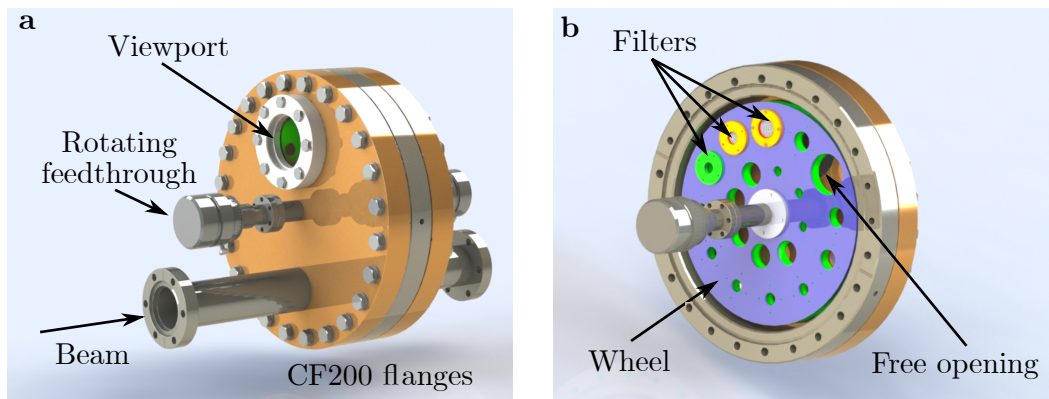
Filterwheel CAD drawing. a) The beam propagates from left to right through the selected filters. A CF50 viewport eases the installation and inspection of the filters in the wheel. b) Inner view of the design. On each wheel 11 openings for filters, plus one for the unfiltered propagation, are present. A second wheel (in light green) is behind the first one (in violet) with a mirrored design.
